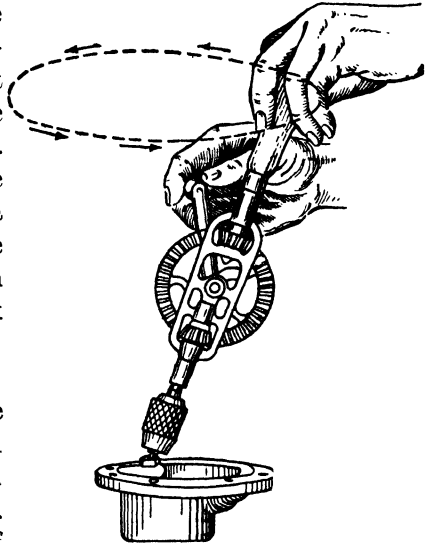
When grinding ball disks, turn the crank while moving hand drill along dotted line. (Courtesy of Armstrong Machine Works.)
